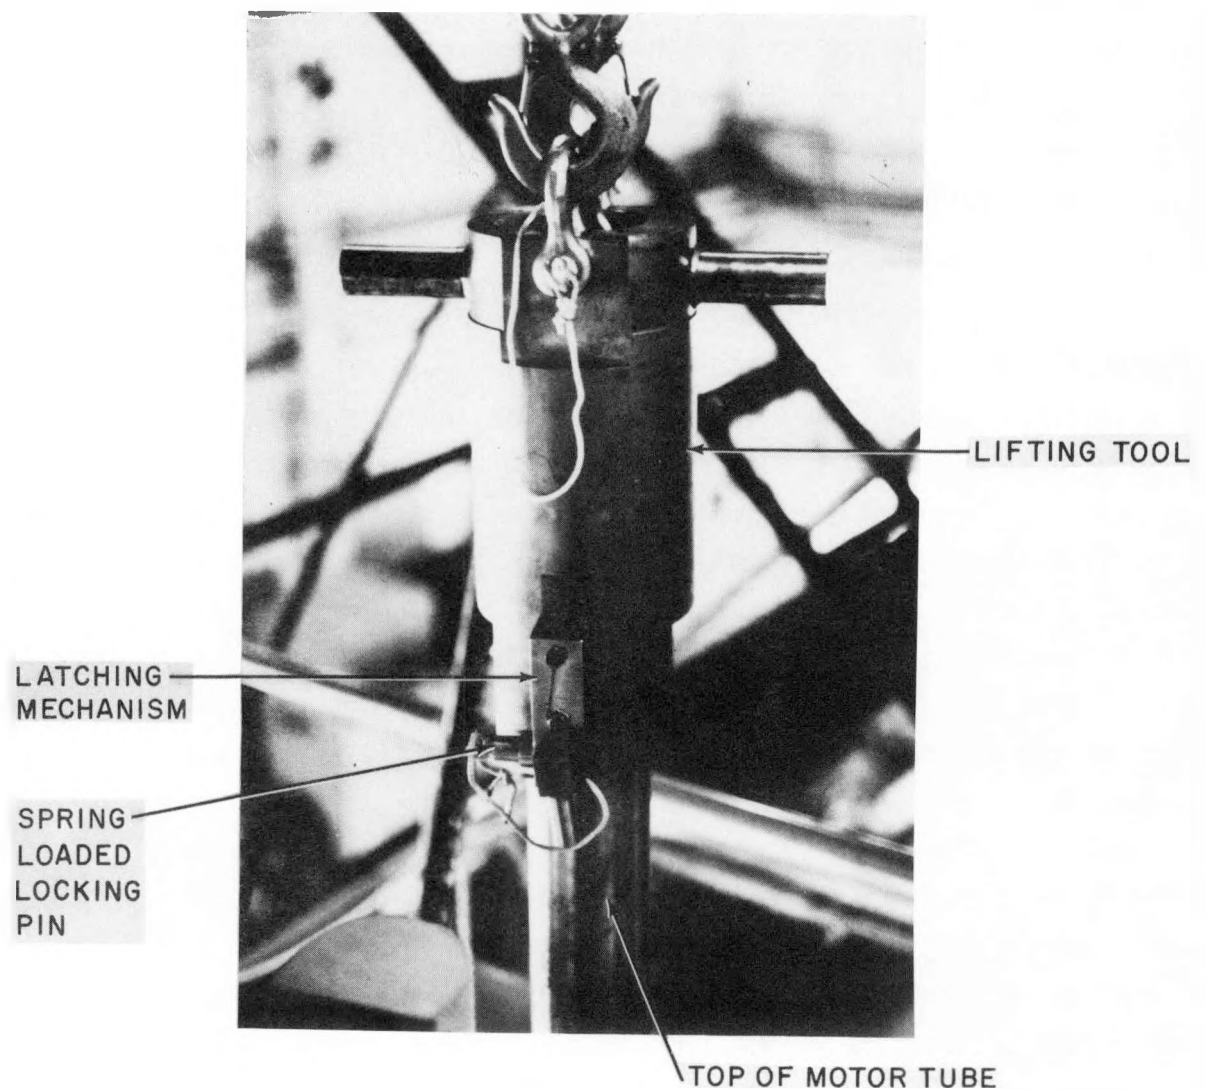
Motor Tube Lifting Tool Latched Onto Motor Tube
